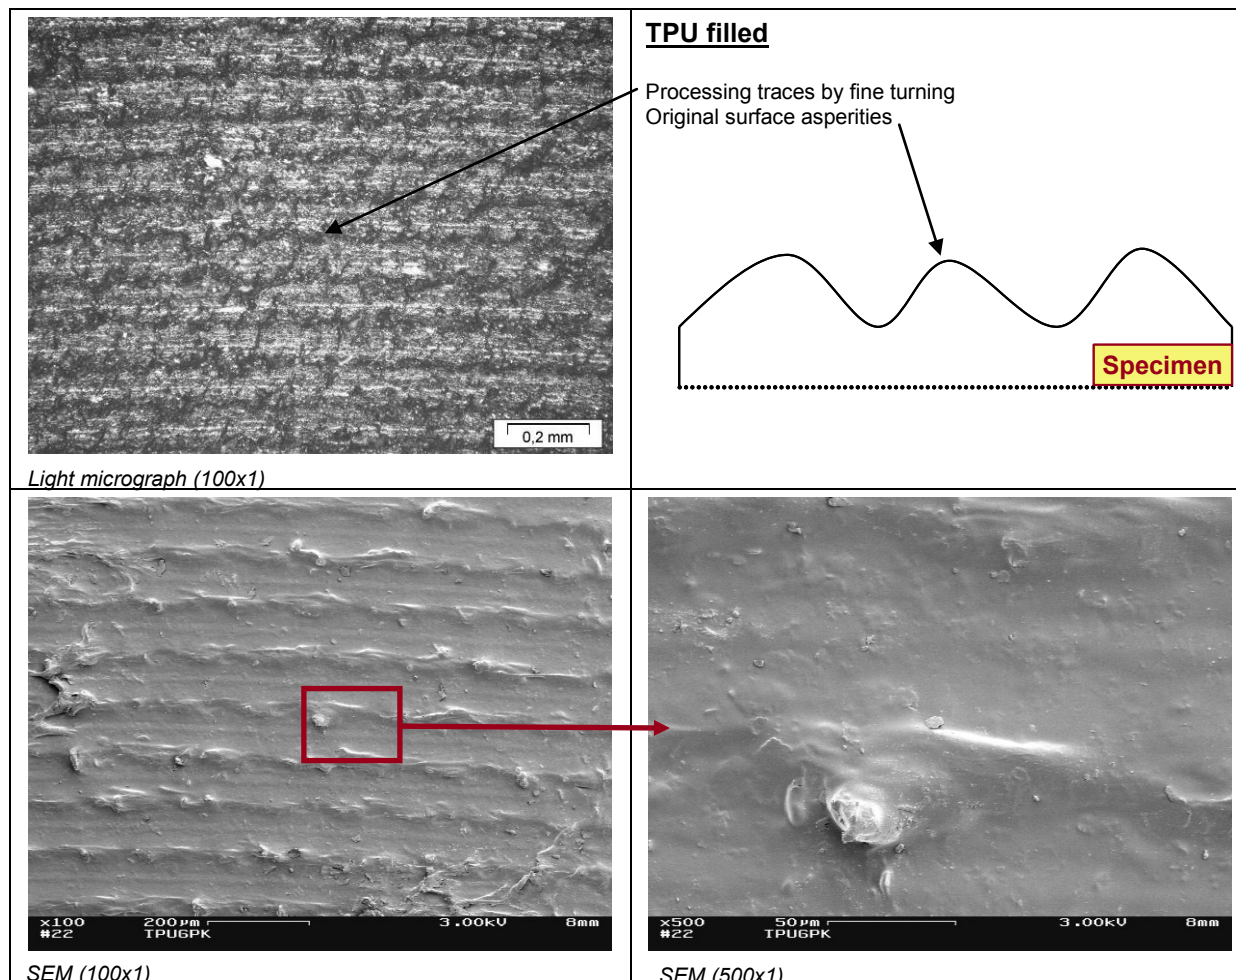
Surface in manufacturing condition (turning grooves); TPU filled
